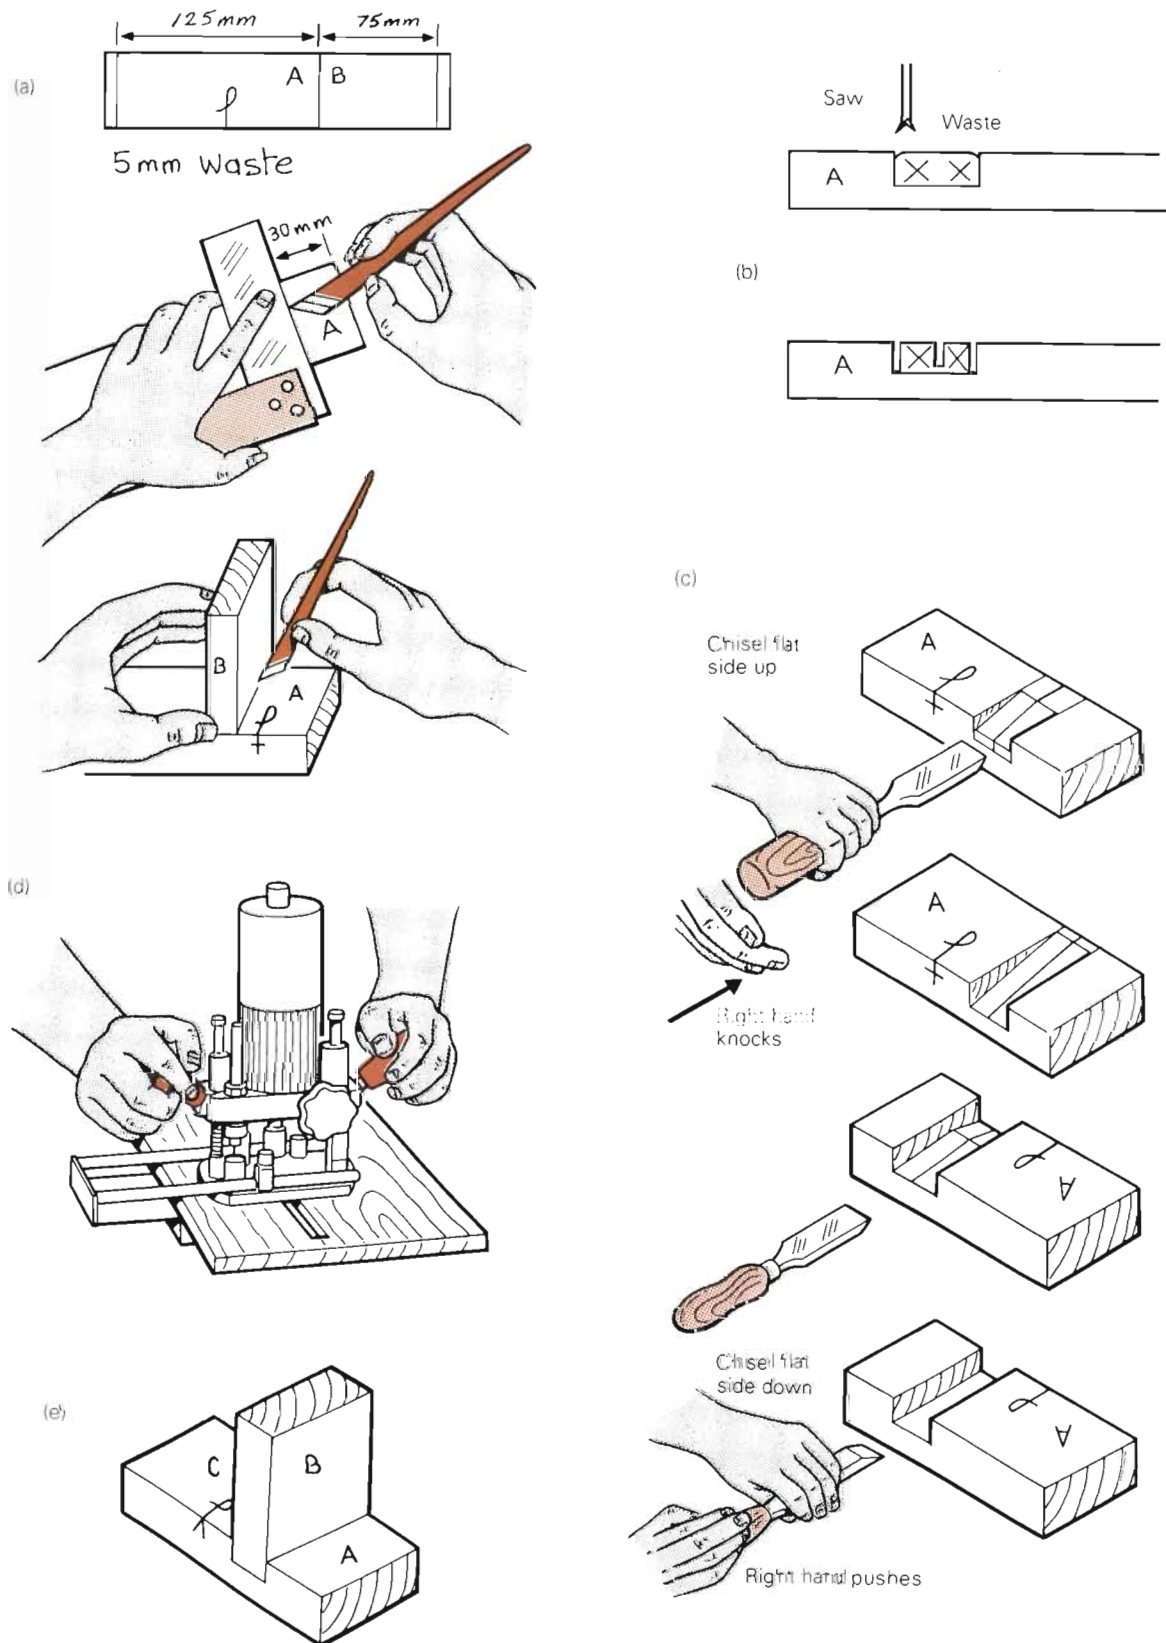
Preparing a through housing joint: (a) marking out, (b) sawing, (c) chiselling out waste, (d) using router plane, (e) the finished housing.
